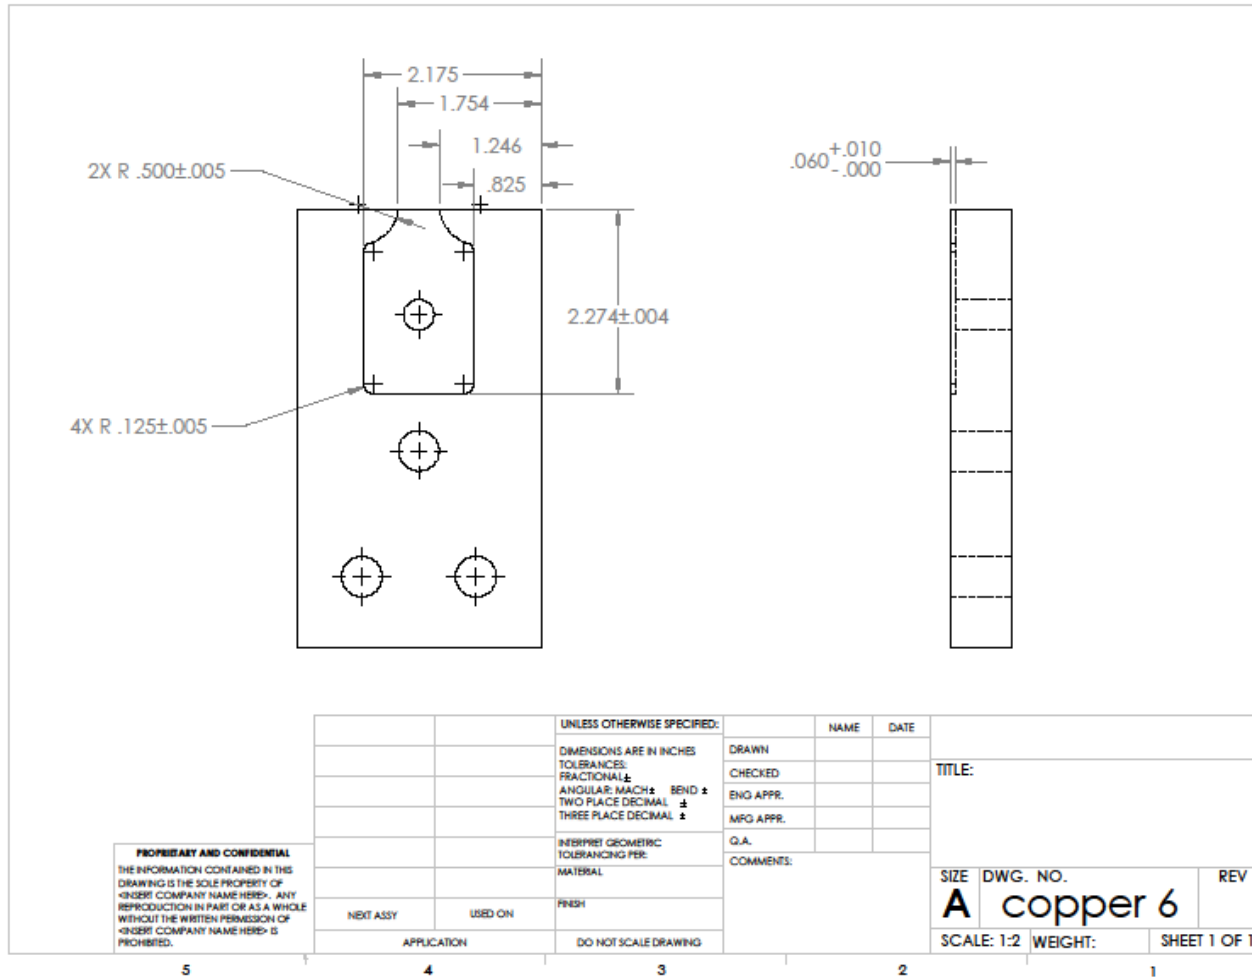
Technical drawing of the copper specimen holder. All dimensions in inches.
